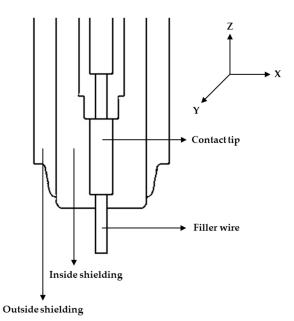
Schematic design of double-shielded GMA welding torch.
